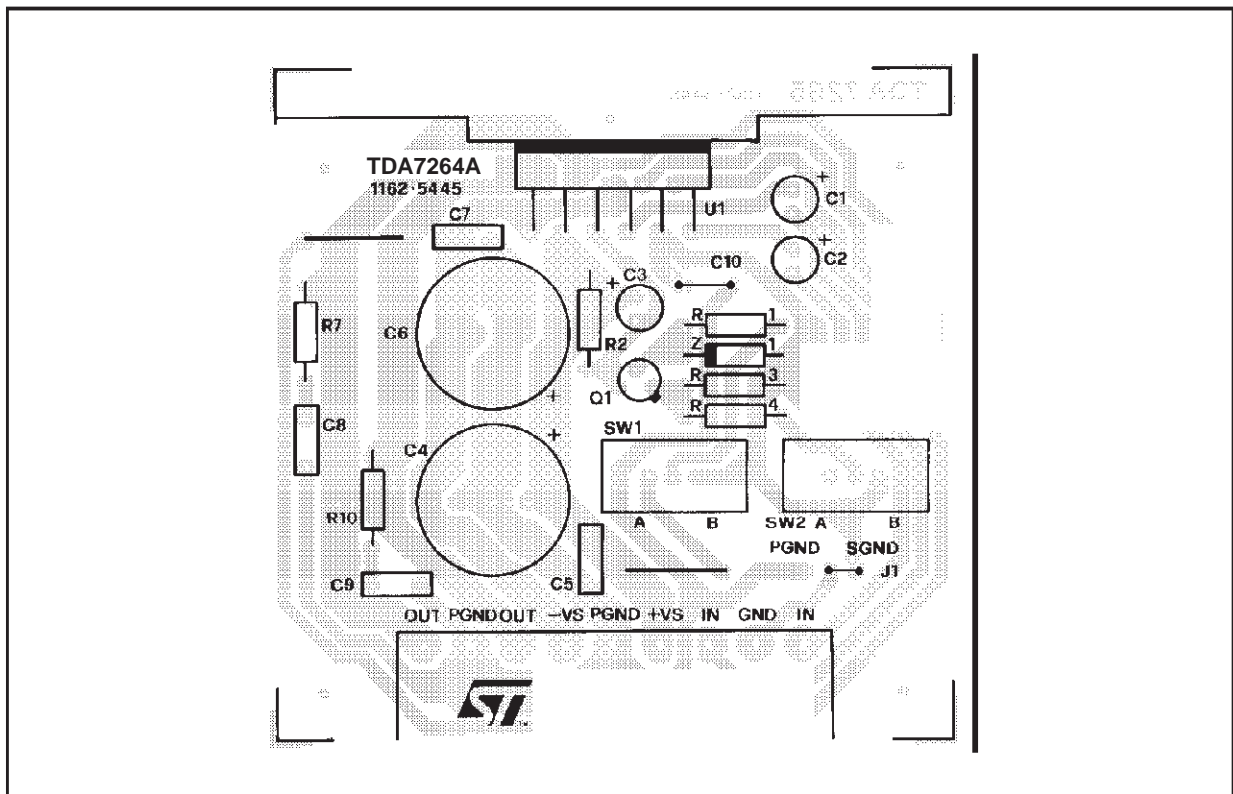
P.C. Board And Component Layout of the Demo Board Schematic TDA7264A (1:1 Scale)
